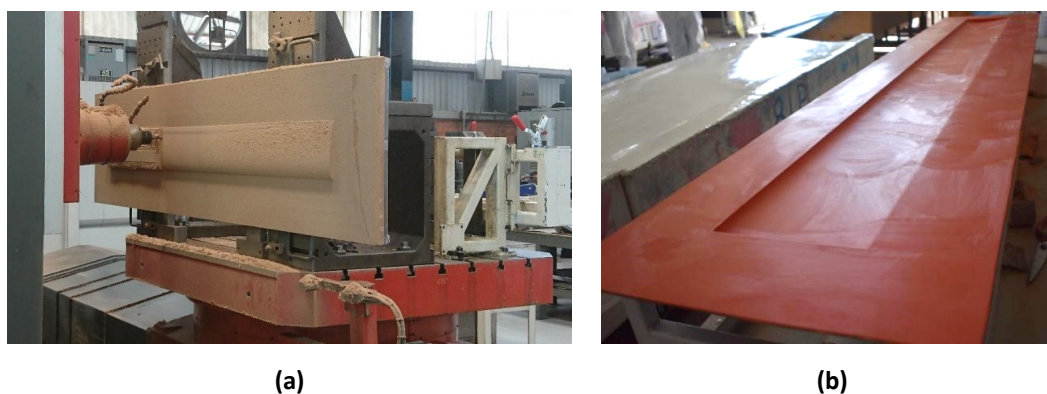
(a) Master plug machined with CNC machine, and (b) Mold for 1 kW VAWT blade.
